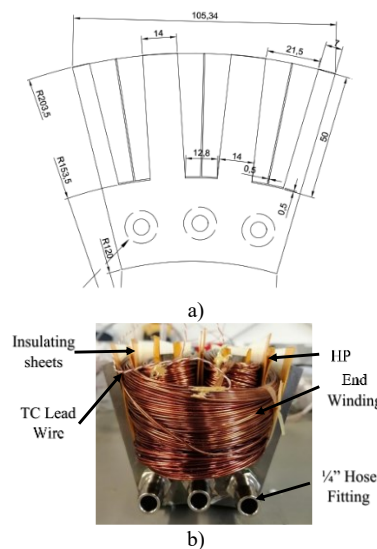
Motorette a) dimensions and b) windings for Moto1 and Moto2.
